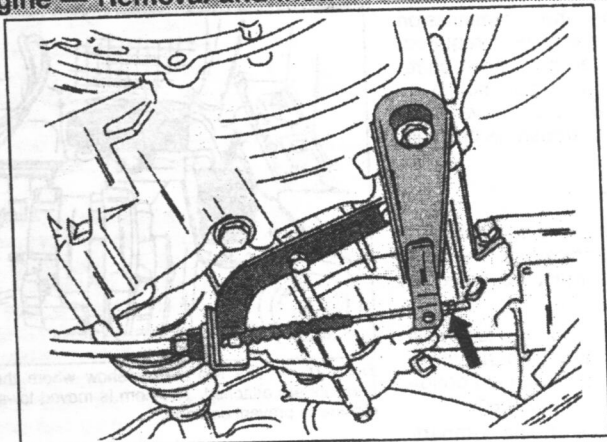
The clutch pedal height is adjusted by rotating the two nuts at the outer end of the clutch release lever.
